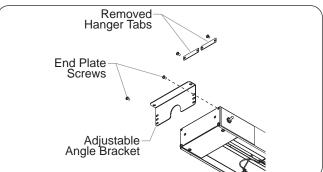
Aluminum Model Adjustable Angle Bracket Installation
